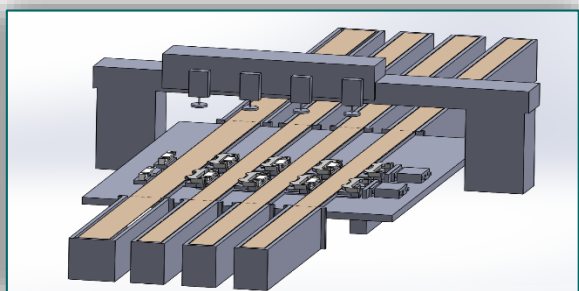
A 3D model of the implemented system for gripping parts on the engraving machine [6]
